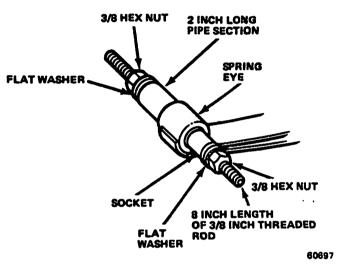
N-9 Bushing Replacement Tools-Small Bushing
